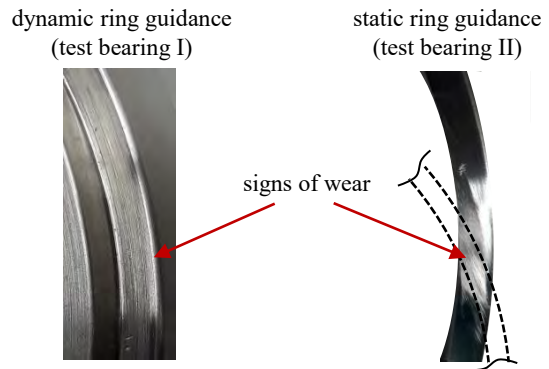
Signs of wear at the surfaces for axial ring guidance.
